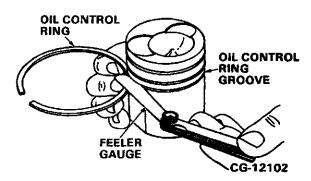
Check Oil Control Ring Groove Side Clearance
